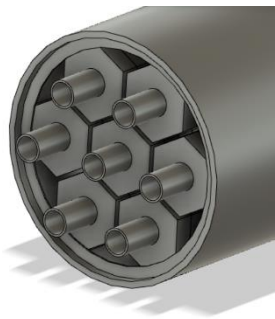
Reactor end with ring plate sealing gas insulating gap. The aluminium plate is therefore hidden. Gas flow channels can still be seen.
